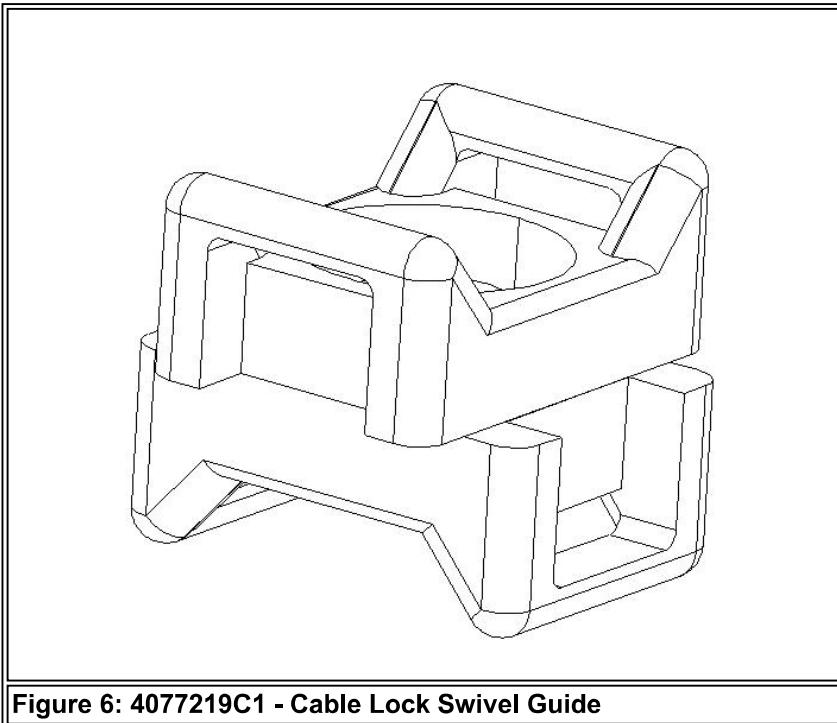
4077219C1 - Cable Lock Swivel Guide
